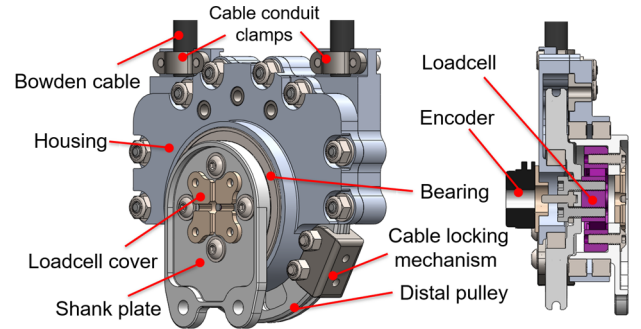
A section view (left) and an isometric view (right) of the cable-driven knee mechanism that actuates both knee flexion and extension. It is composed of two cable conduit clamps, a distal pulley, a housing to enclose internal components, a load cell cover, an shank plate, a cable locking mechanism (it also prevents knee hyperextension), a ball bearing, an encoder, and a custom load cell that measures up to 50 Nm torque.
